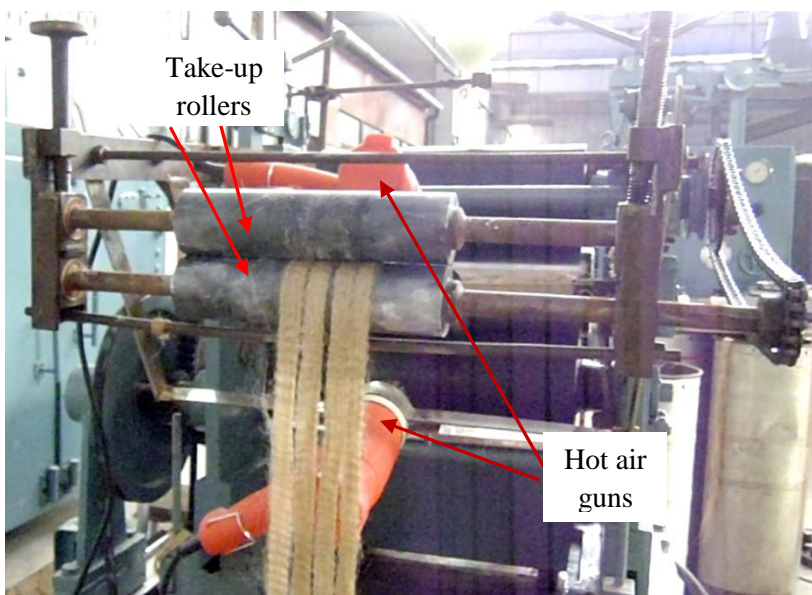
Multiple jute tapes coming out of squeezing roller nip and entering drying zone
